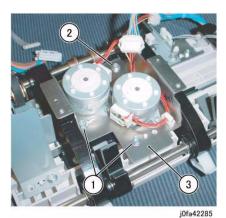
Removing the Front/Rear Tamper Motor Assembly
